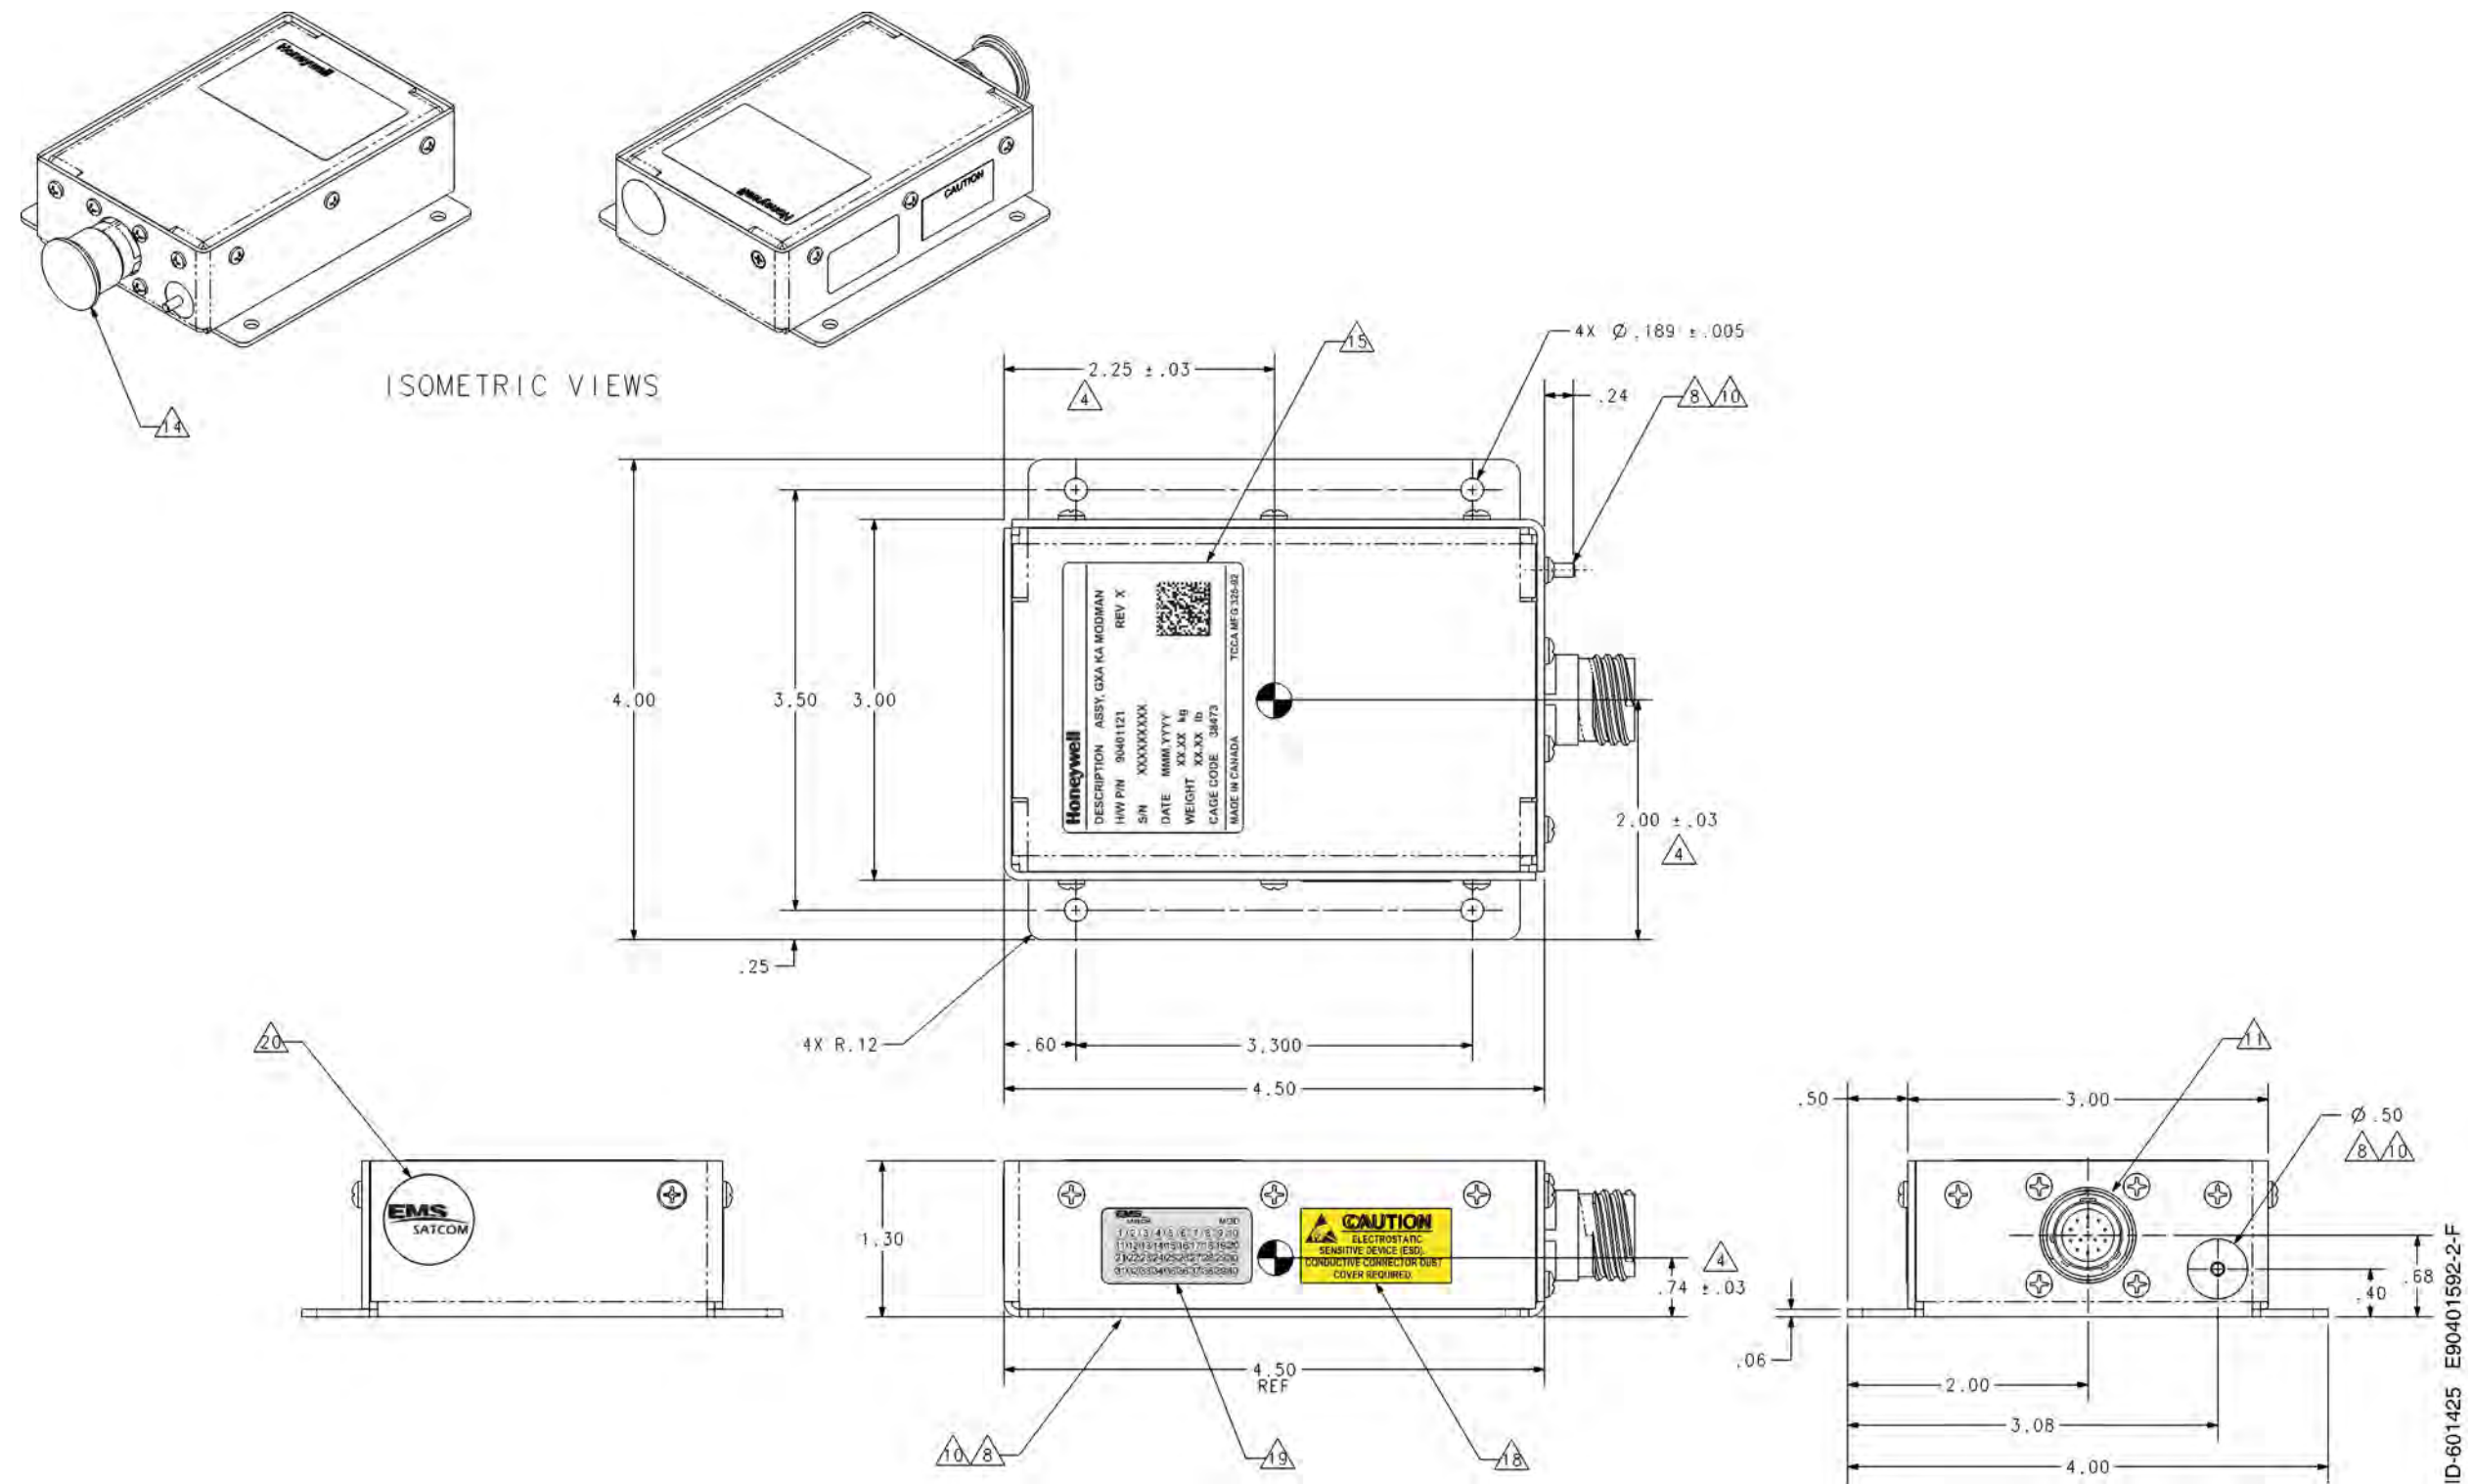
(Sheet 2 of 2) APM Outline and Installation Drawing (90401592, REV F)
